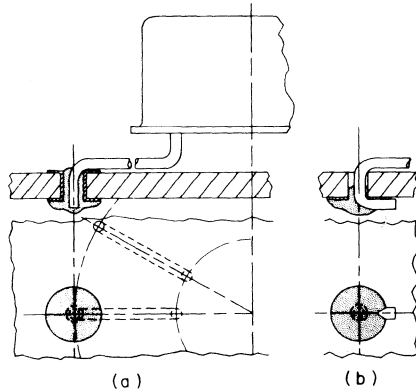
Straight-through mounting method for RCA TO-5-style packages: (a) with leads radially offset; (b) with radially offset leads that provide a clinched-lead option.
